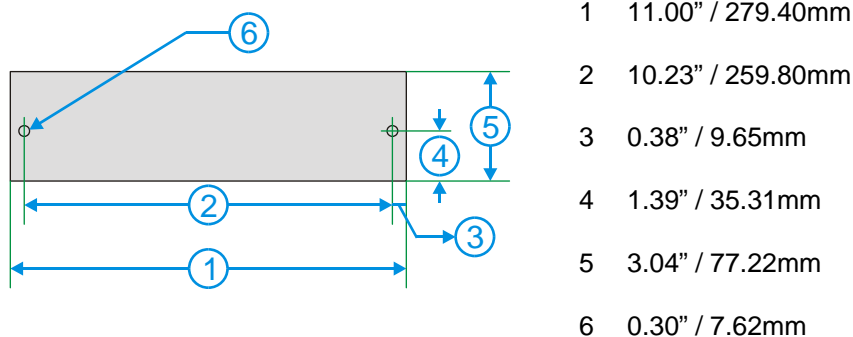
UPS Battery Pack Remote Mounting Dimensions
